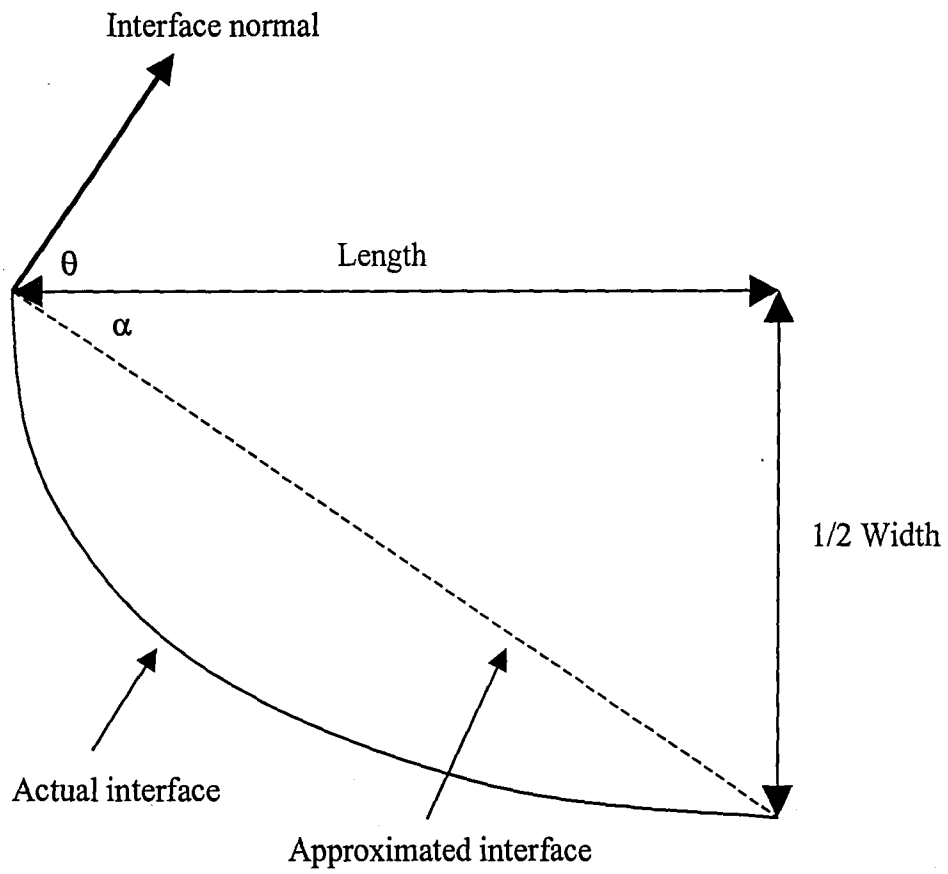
B – Physical derivation of  $\theta$  angle for hemispherical weld pool shape conditions.
